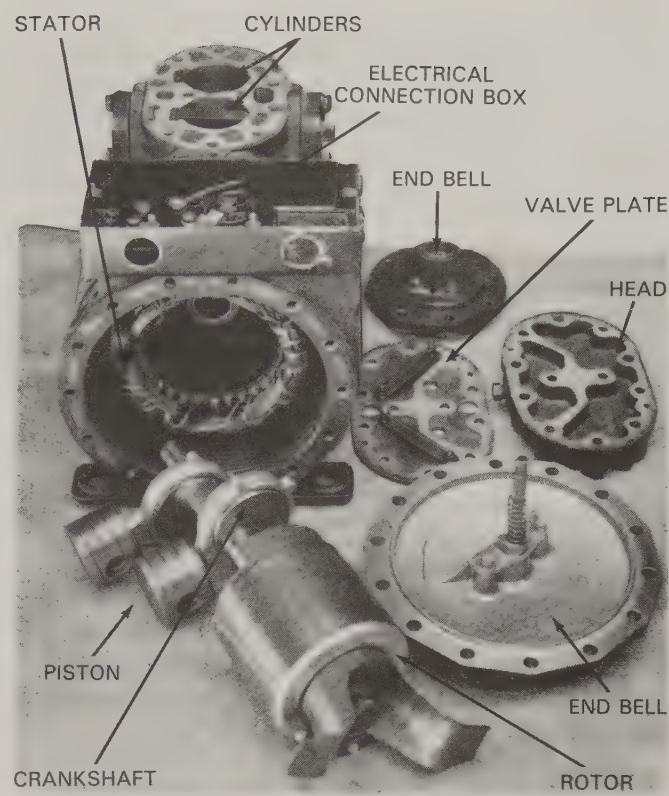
Components of a typical semi-hermetic compressor, which can be disassembled for field service.
